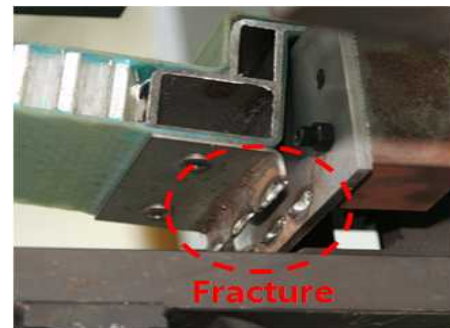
Photograph of the fracture state at the welding site under the cyclic bending loads ②
